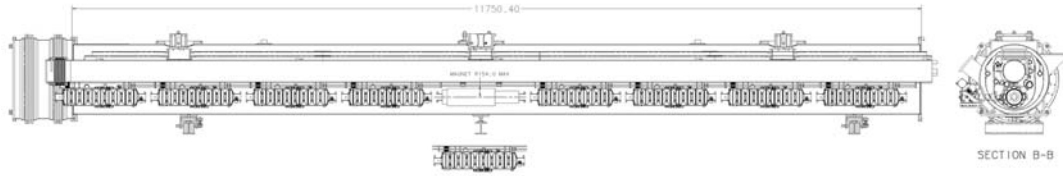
Cryomodule Assembly and plug-compatible conditions.
